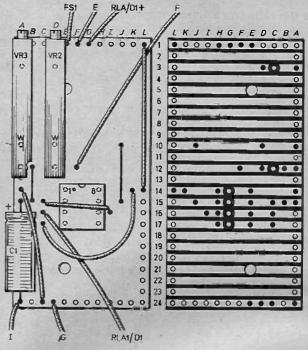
Layout and wiring of the components mounted on the Veroboard.
